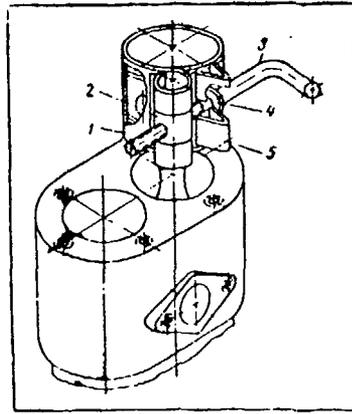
Installation of Piston With Connecting Rod and Rings Into Cylinder of Compressor Block Using Model 2494 Device: 1, collar; 2, nut; 3, screw; 4, washer; 5, support
